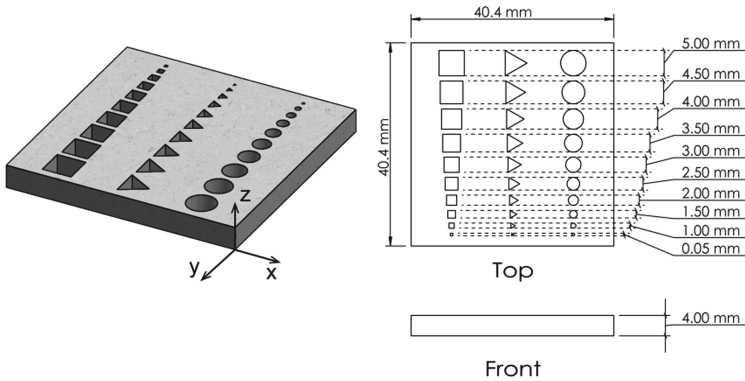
CAD-designed test component for x - y plane shape accuracy assessment.
